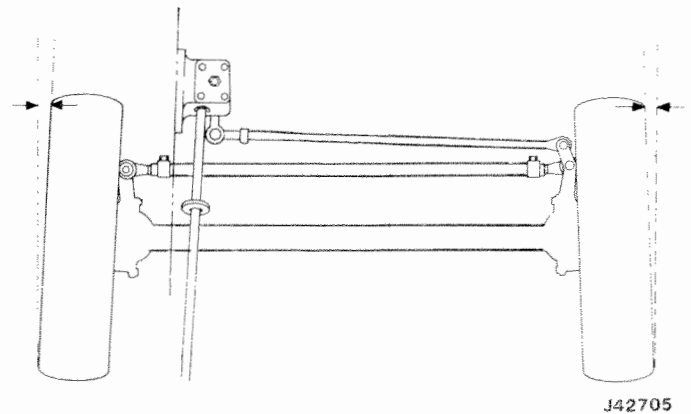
Front Wheel Toe-In (Top View)—Typical
